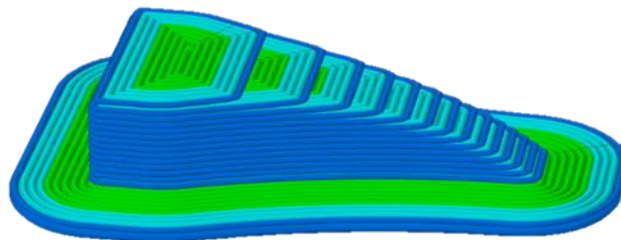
Slicing process that translates CAD files to layers and machine code
